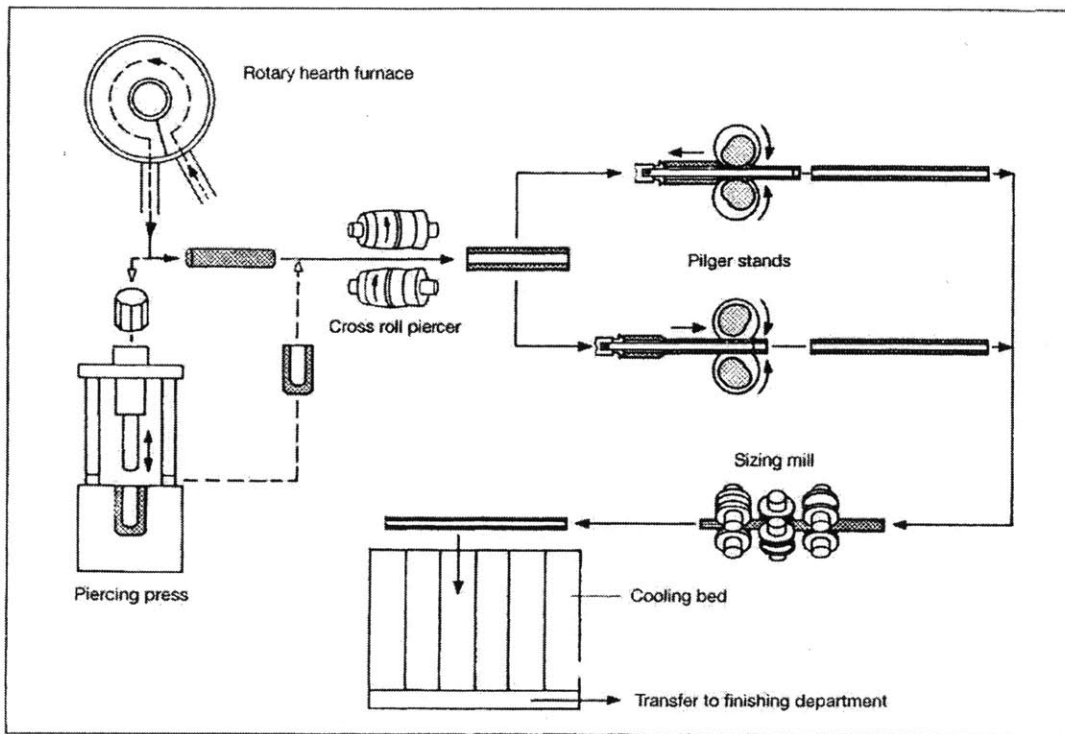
Schematic representation of the pilger mill manufacturing process [64].
